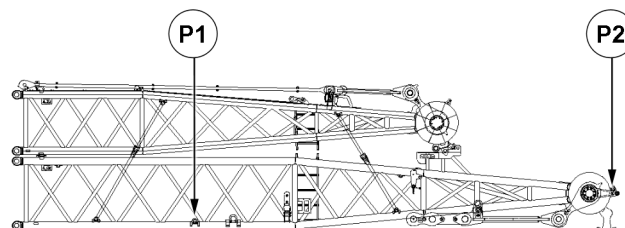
WA-frame 1 end section and WA-frame 2 end section unit fastening points
